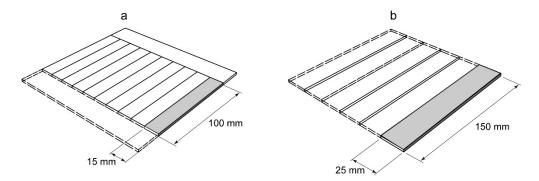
Specimen sectioning for: a) flexural testing; b) tensile testing.
